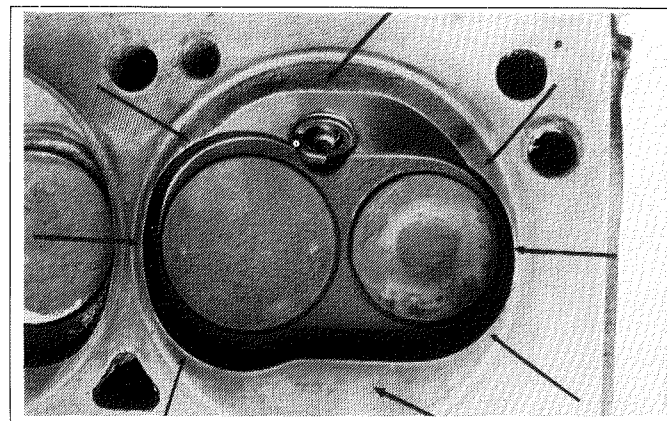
Valve shrouding reduced around inlet and outlet valves by opening out the chamber to the limit of the gasket bore.
